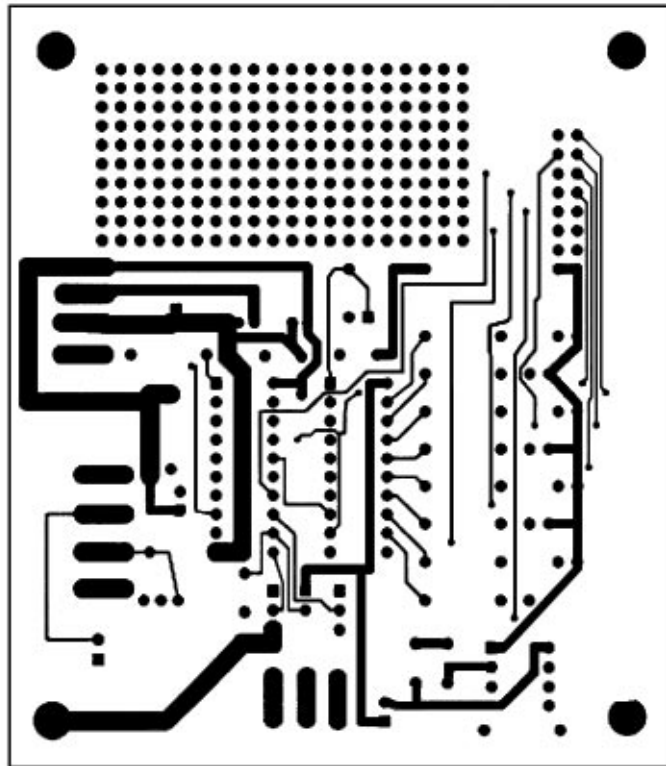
MAX152 EV Kit Solder-Side Layout (Mirror Image)
